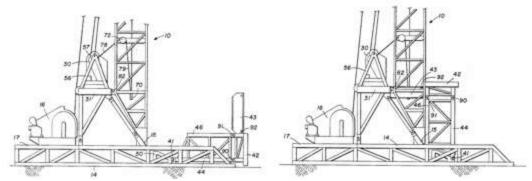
Patent 3,483,833 illustrating drawworks at lower elevation than work floor
